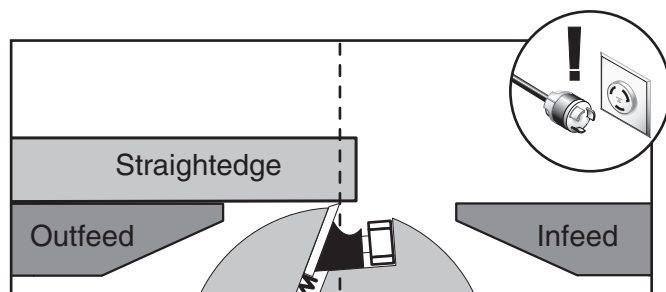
Using a straightedge to align outfeed table height with knife at TDC.
